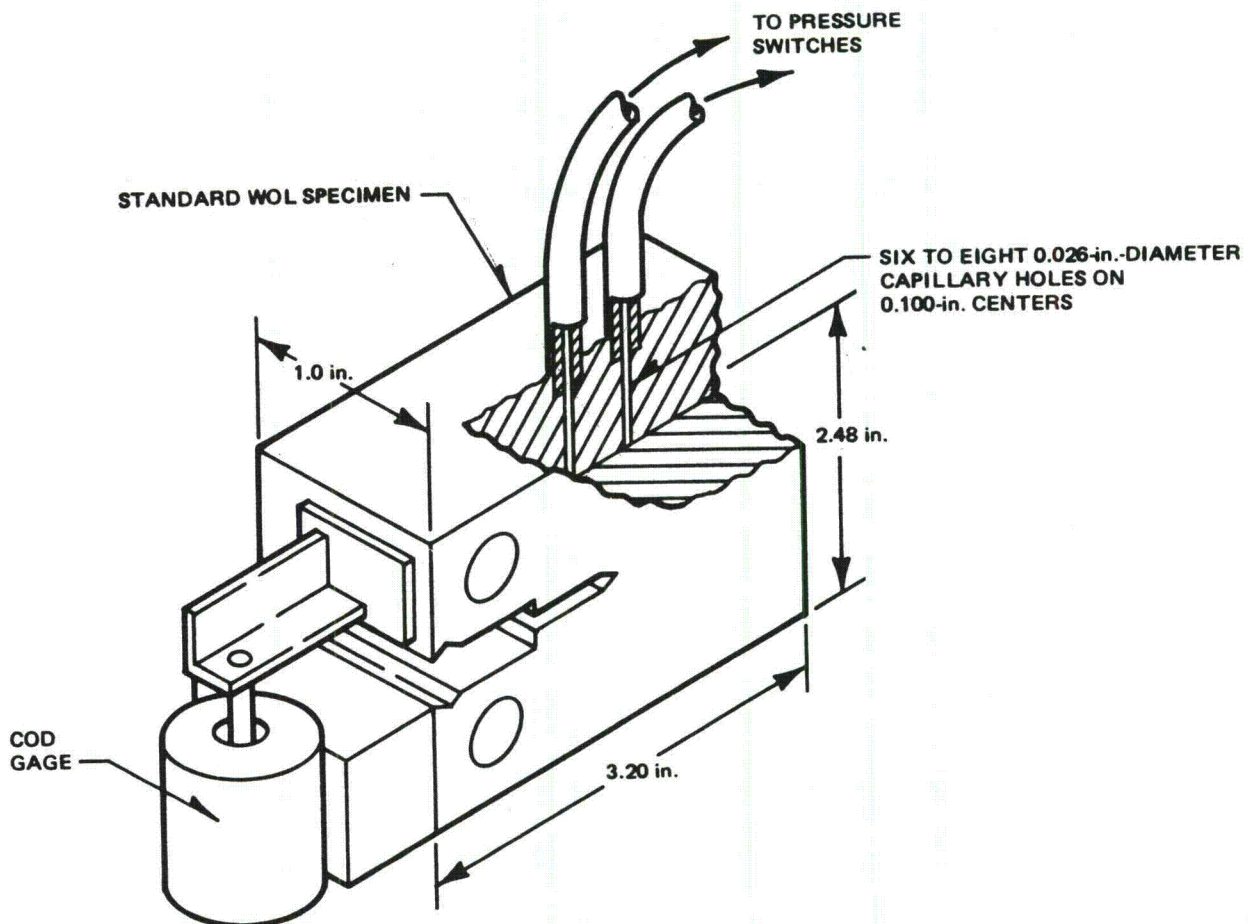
Specimen Modifications for Remote Crack Length Measurement Capability
